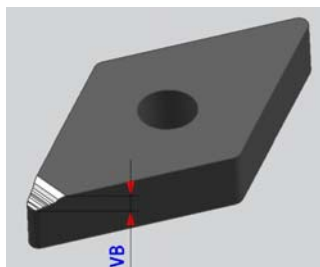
Show machine used to measured of tool life and Flank Were (VB)
